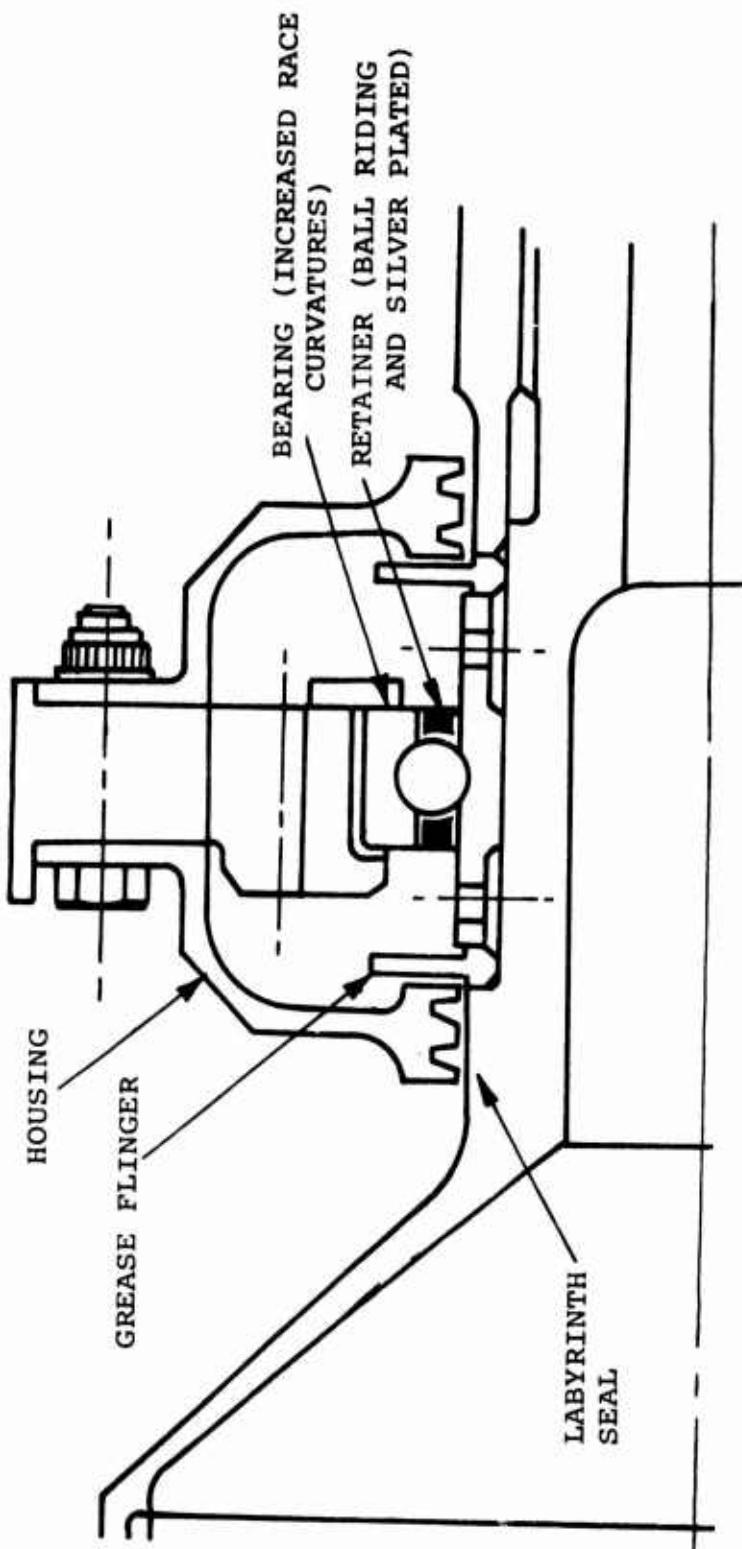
Final HLH/ATC Engine Shaft Support Bearing Configuration.
